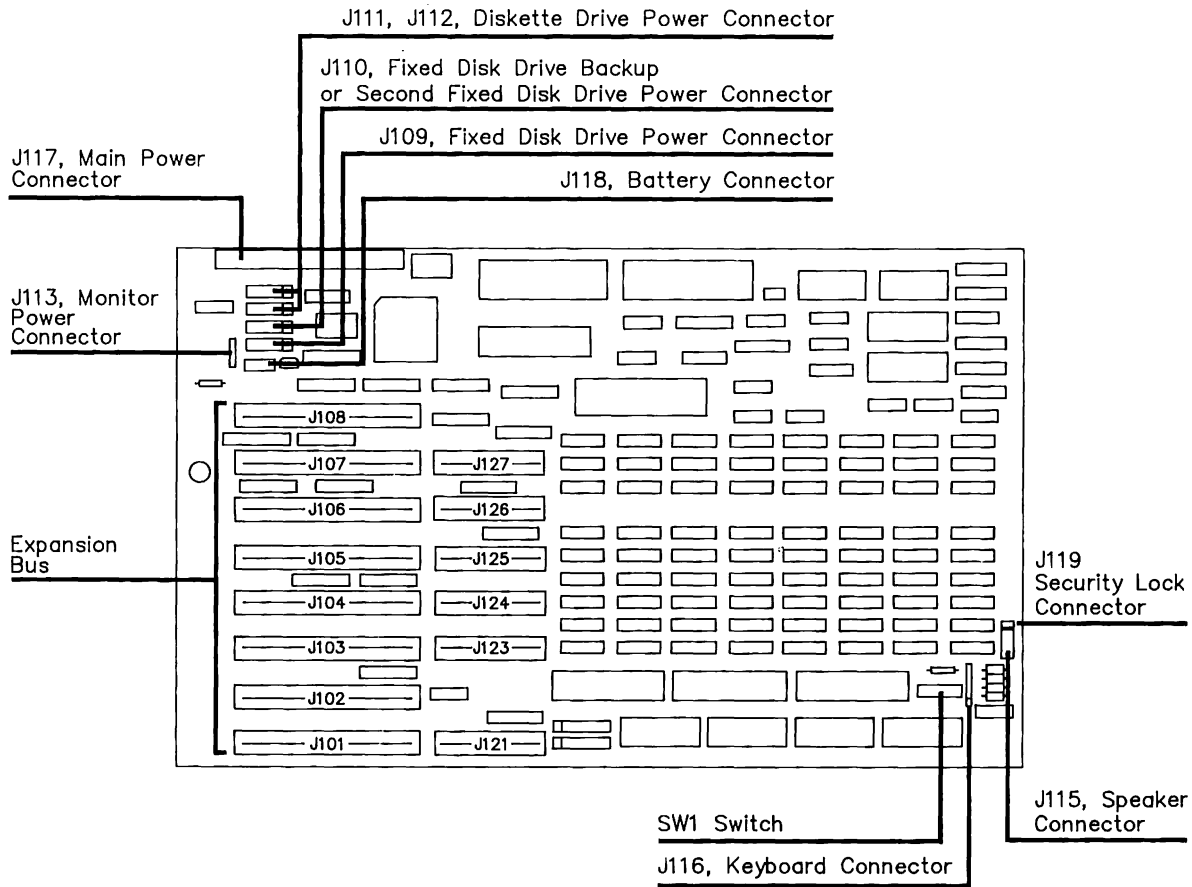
COMPAQ DESKPRO 286 Version 2 System Board Connectors and SW1 Location
